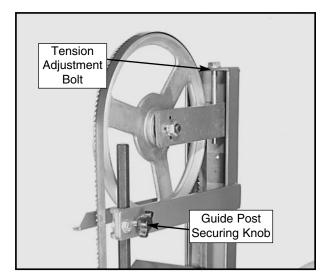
shows the tension adjustment bolt and the guide post securing knob locations.
